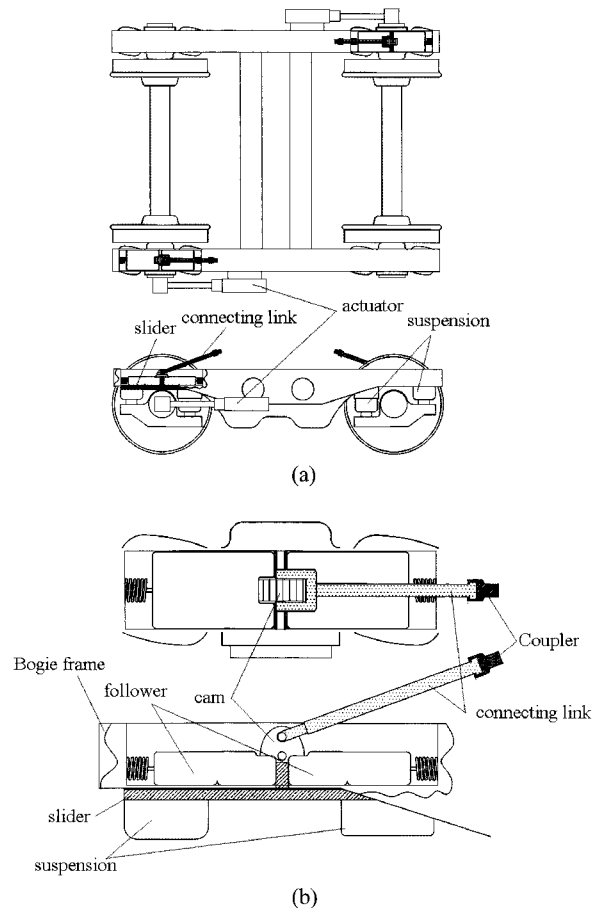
Concept design of the proposed active steering bogie: (a) overall view of the bogie (b) detailed view of sliding mechanism
